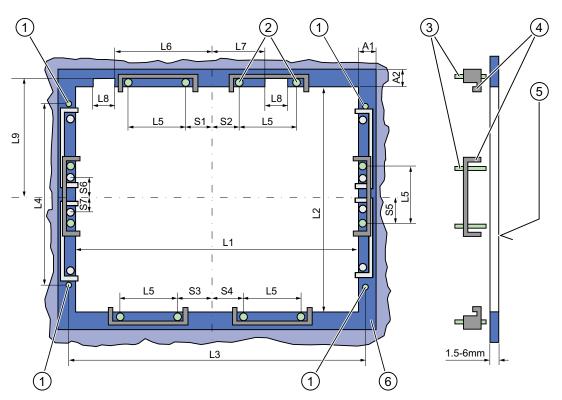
Drill holes for the screws and pressure points for the clamp screws
